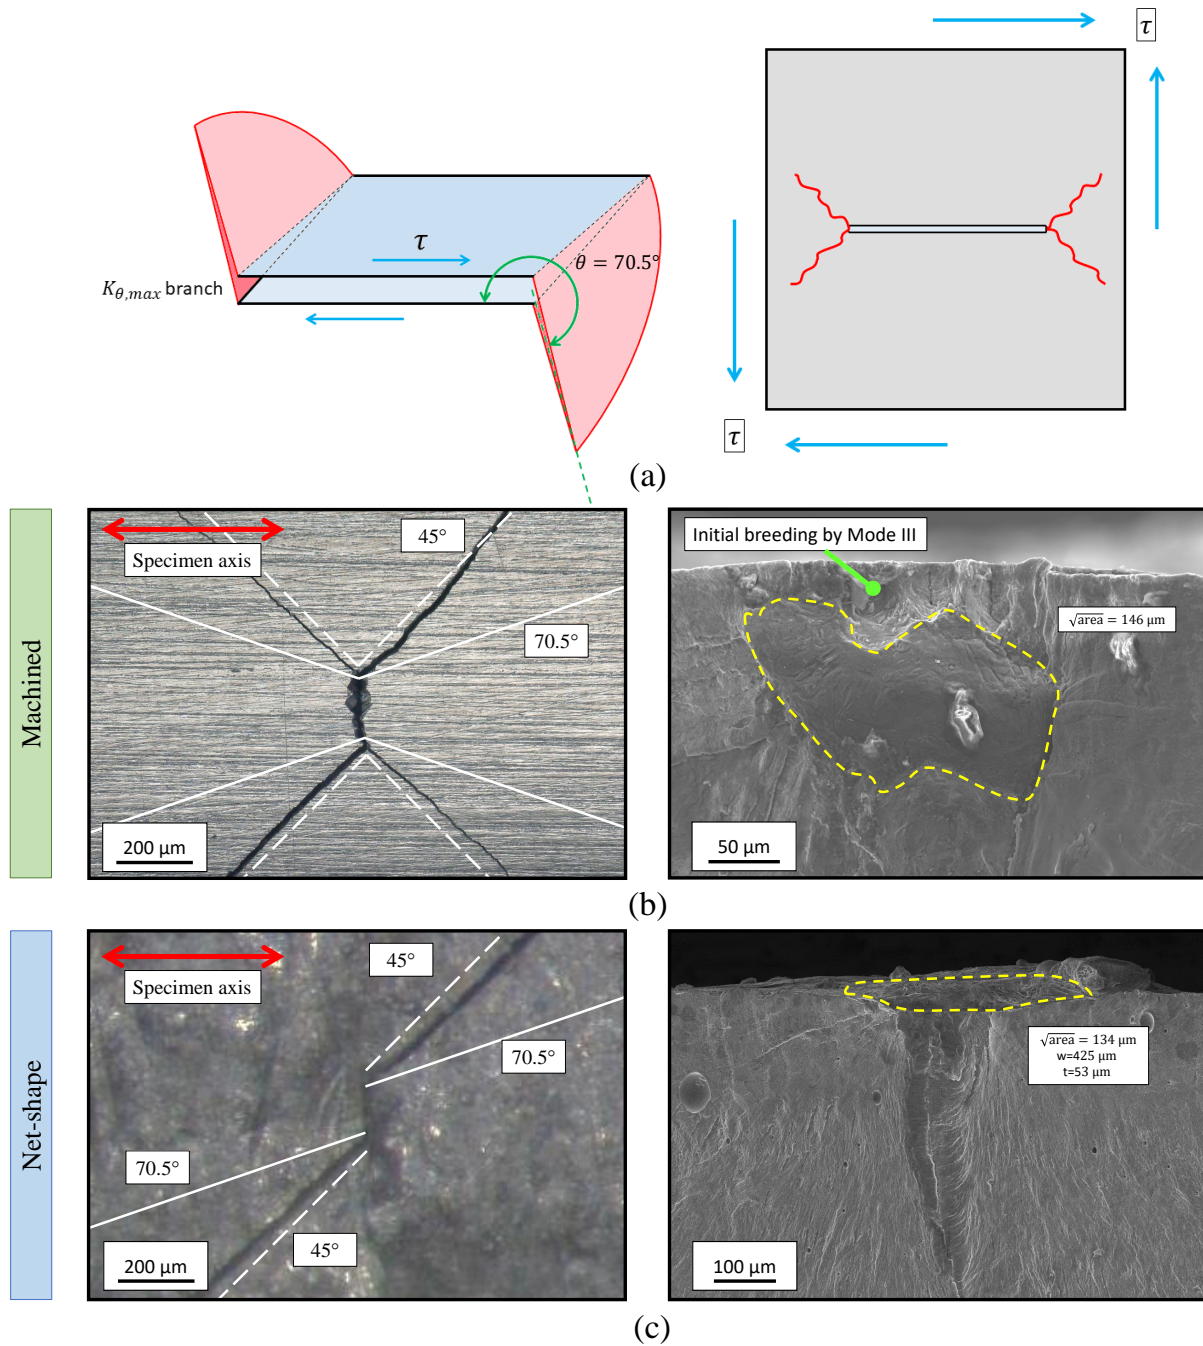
Failure mechanisms of fatigue cracks under torsional loading in case of elongated defects: a) schematic of the mechanism; b) example of a machined specimen failed due to an elongated LoF and c) example of a net-shape specimen failed due to a superficial feature.
